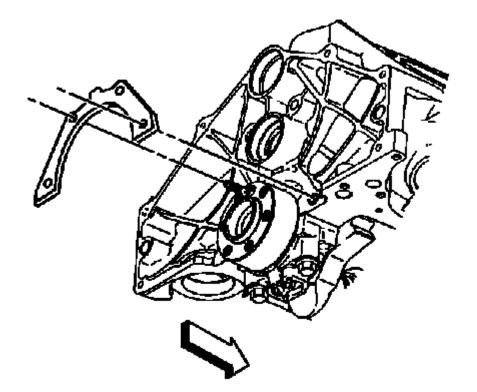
View Of Crankshaft Rear Oil Seal Housing Gasket Courtesy of GENERAL MOTORS CORP.
